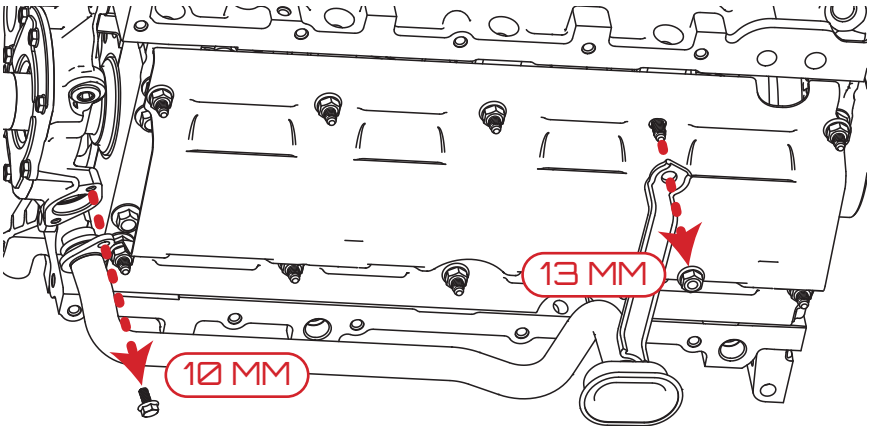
Removing the Factory Oil Pickup Tube (Screen)
